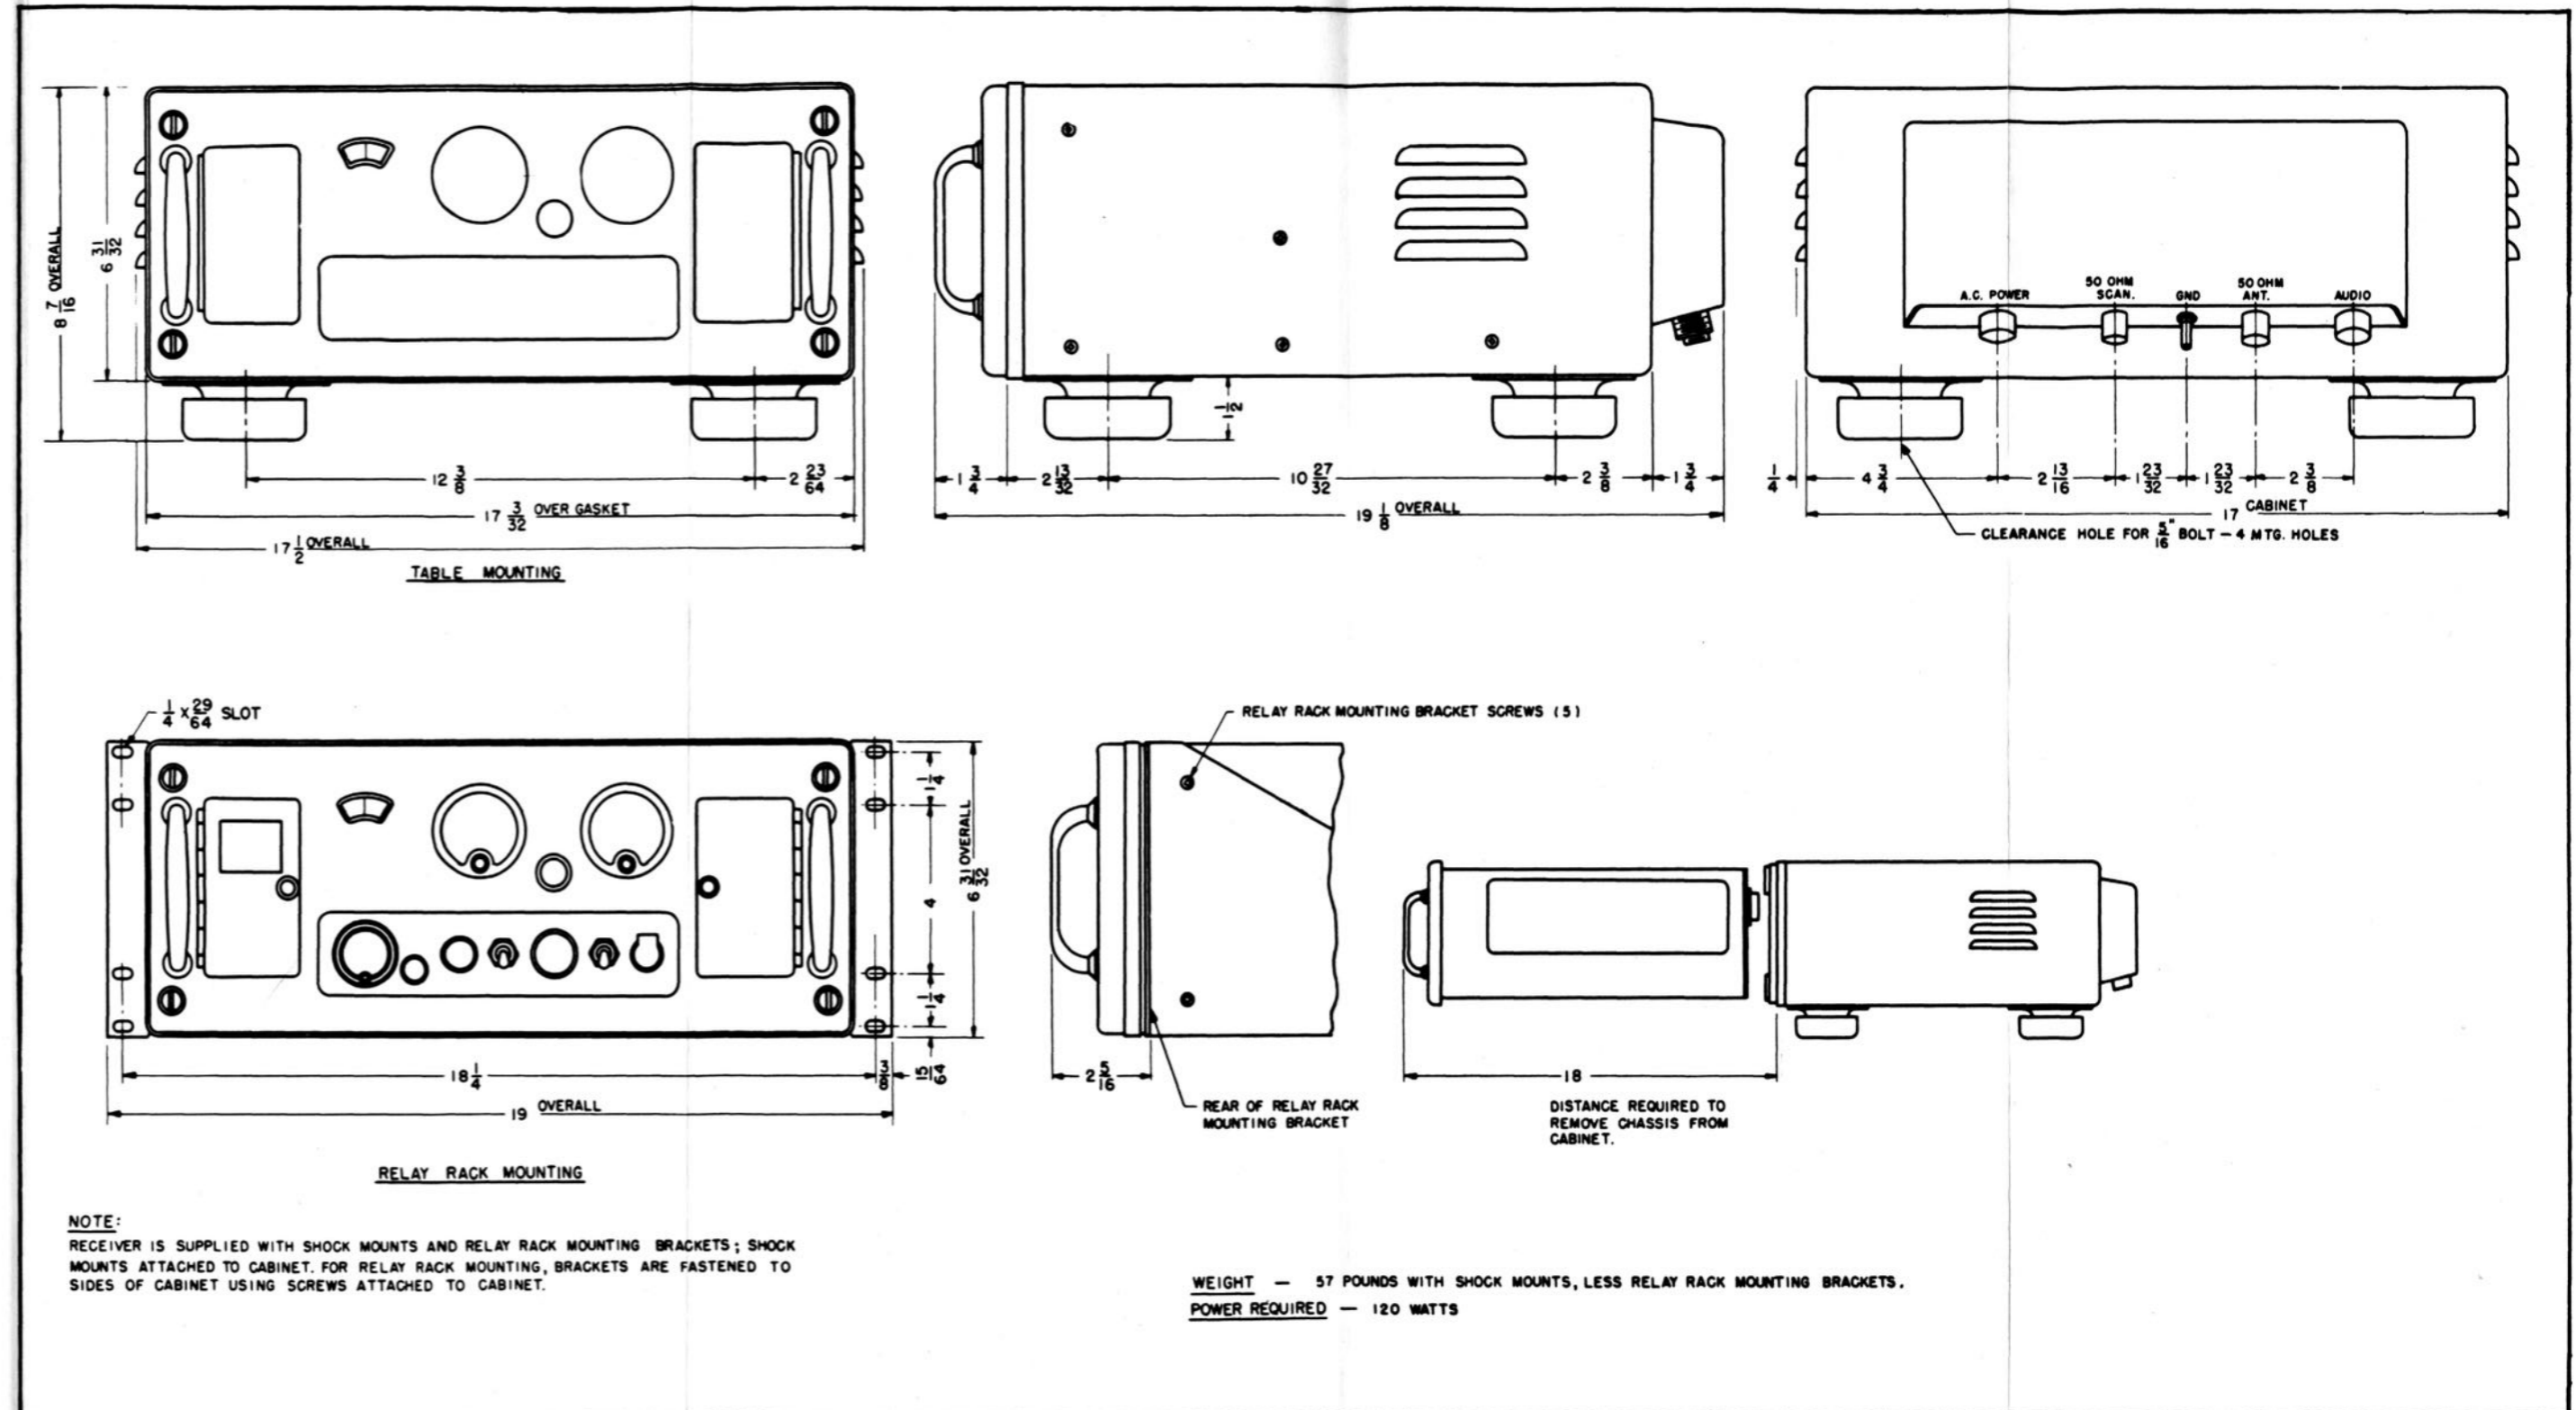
Outline Drawing—Radio Receiver R-516/URR-27
